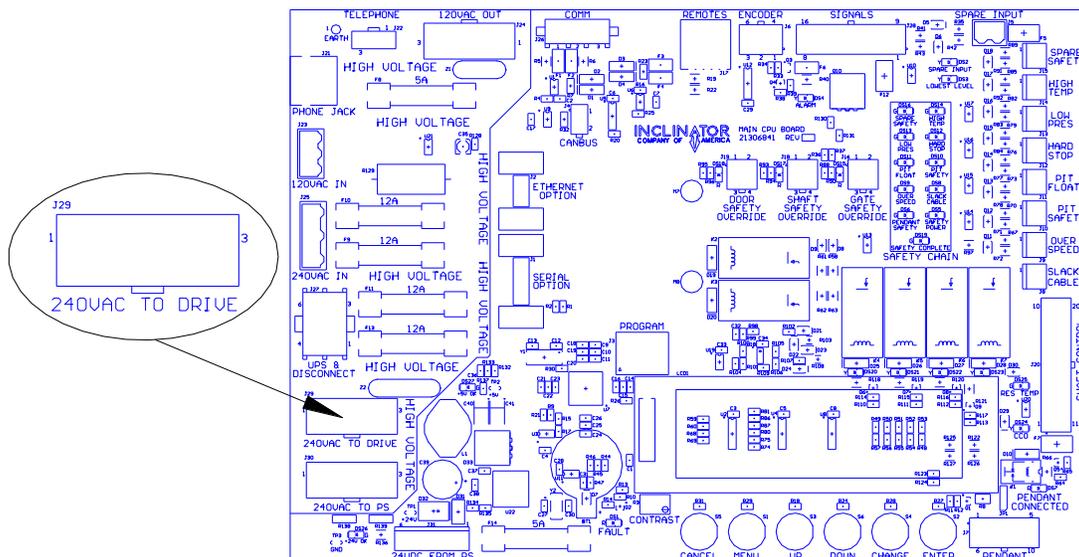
CPU Board, Motor Control Enclosure Power Cable Connections
